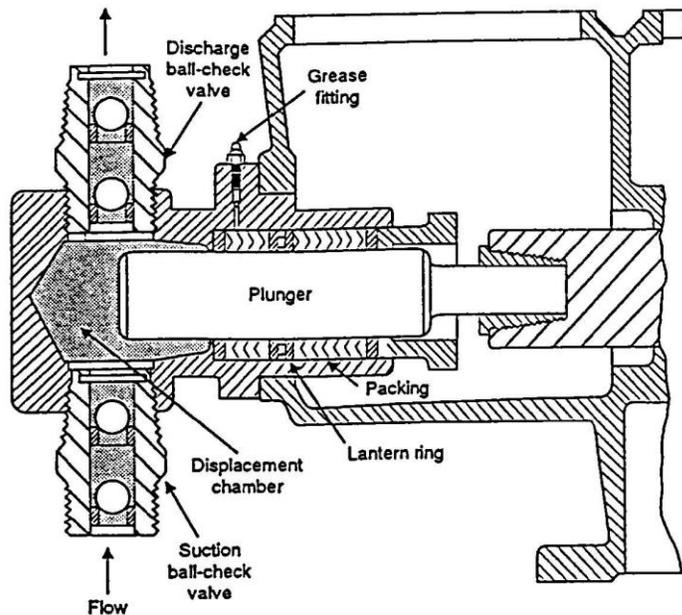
Cross-section drawing of the pump mechanism for a piston type chemical injection pump (Poynton, 1983).
